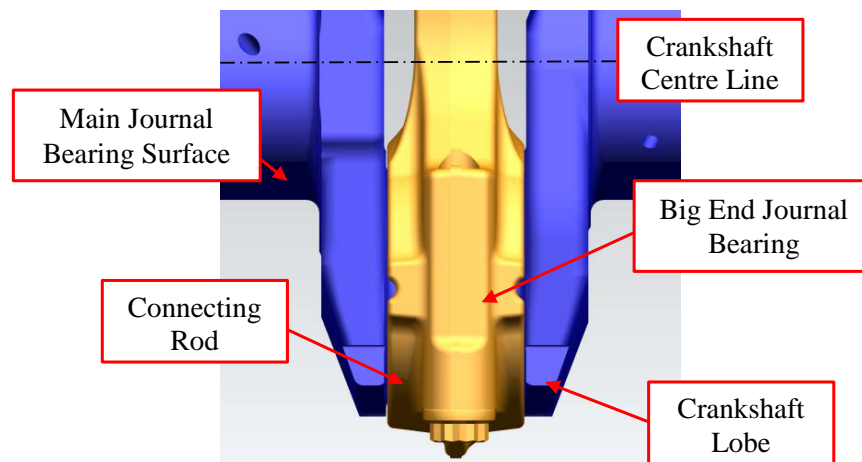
1104C-44 CAD image of crankshaft assembly
